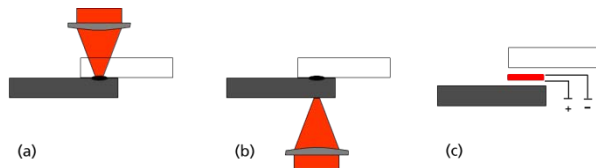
Process principles of metal-polymer joints: (a) laser transmission welding, (b) laser induced metal heating, (c) joining with reactive multilayer systems (RMS)
